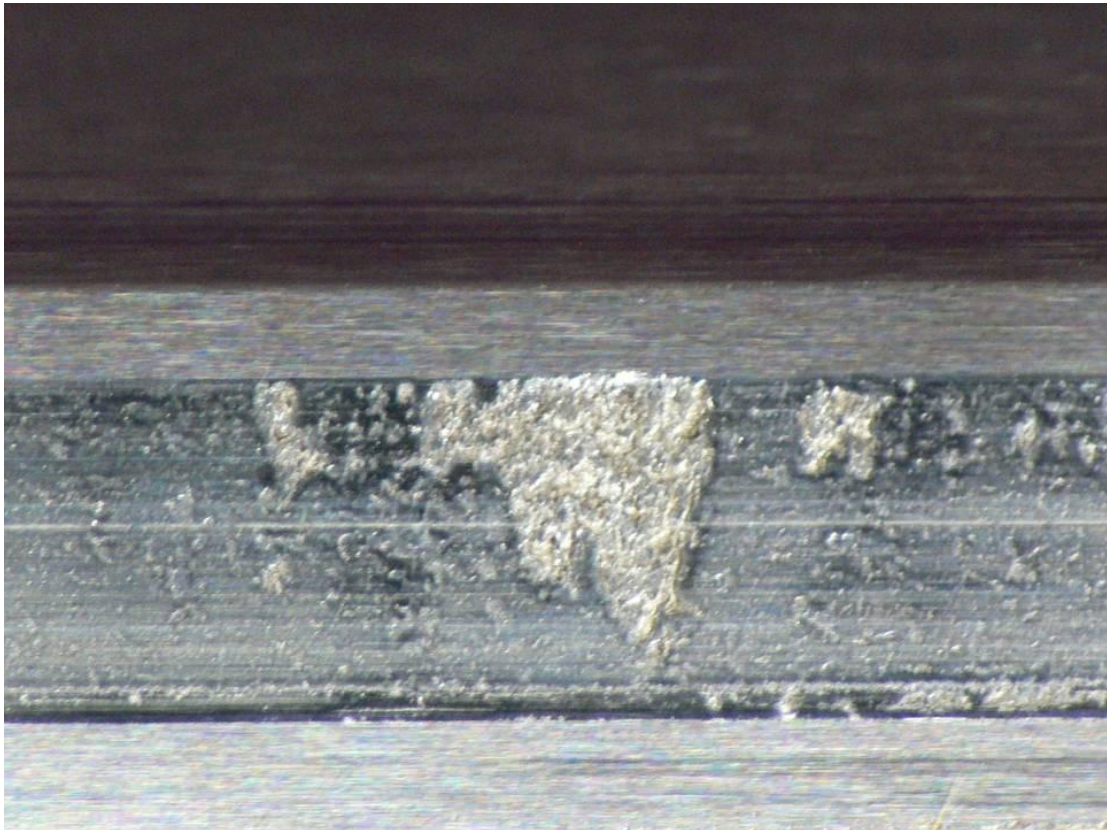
Spalling of rail (645 km 11 kN)
